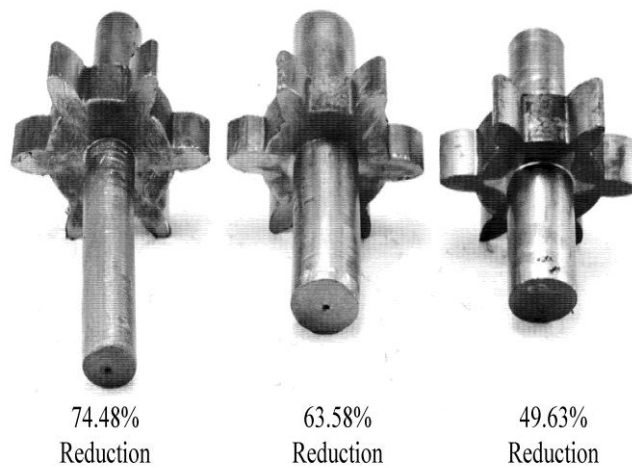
Extruded forward-backward extrusion-forging 6-tooth gear head shaped product
